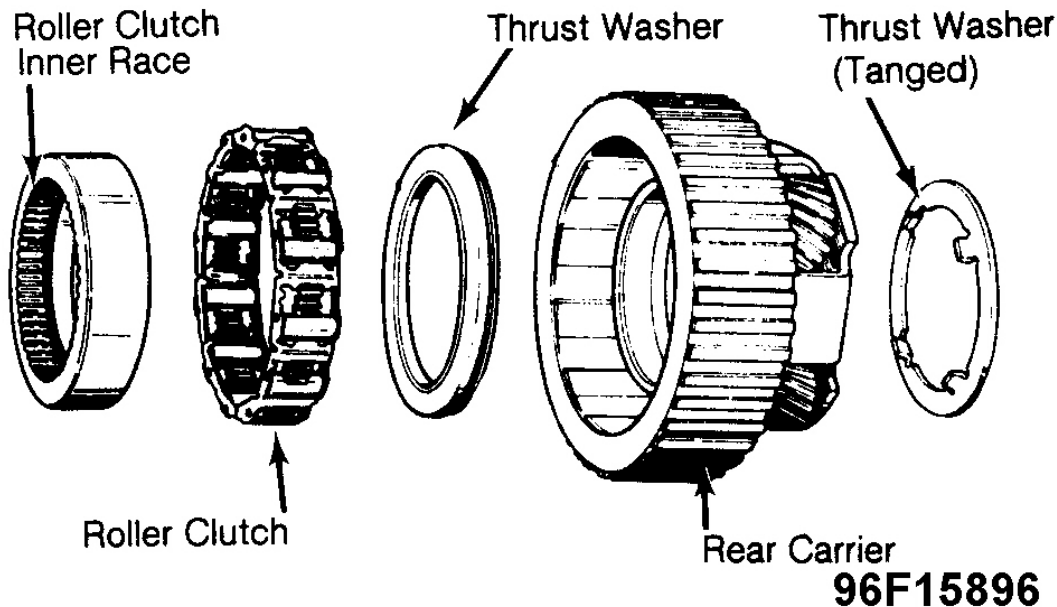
Exploded View of Roller Clutch & Rear Carrier Assembly
